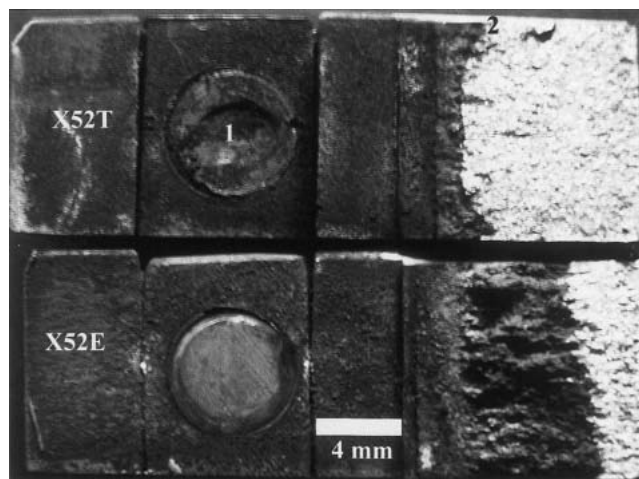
Steel fracture surfaces, showing different crack paths. The number "2" over the X52T steel fracture indicates the start of the surface dissolution bulbs.
